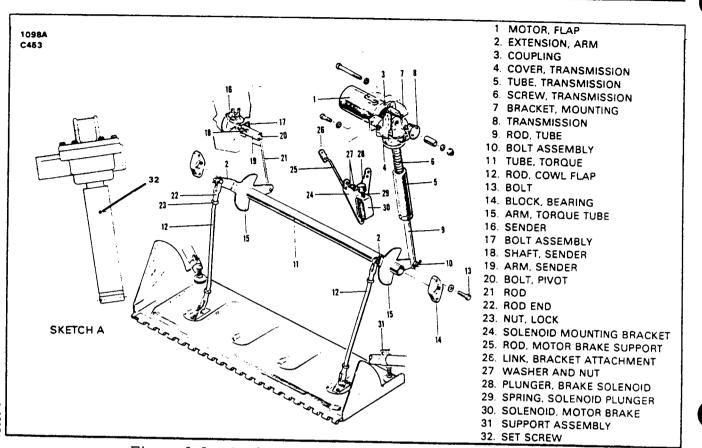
Cowl Flap Transmission and Sender Assembly
